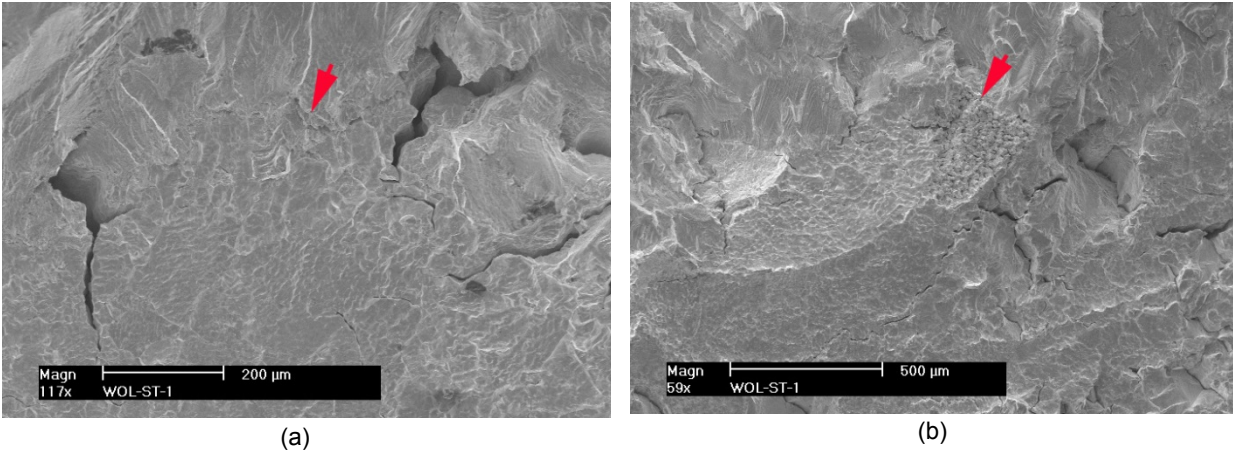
Fracture surface of specimen WOL-ST-1 at (a) location 7, and (b) location 8 in Fig. 3-35. The red arrows indicate IG fracture mode at the end of the test. Crack advance is from bottom to top.
